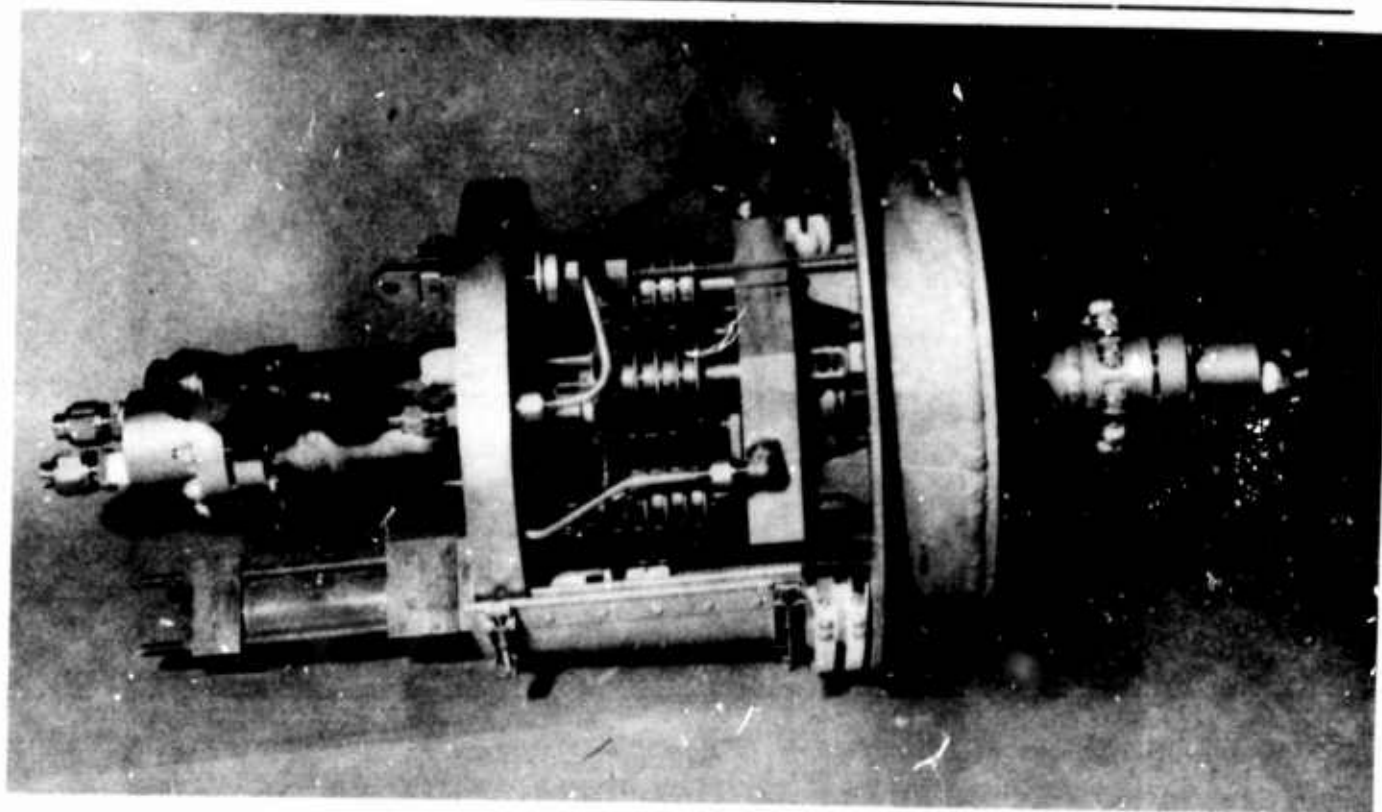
Prototype QD Coupling, One-Half Shroud Removed
